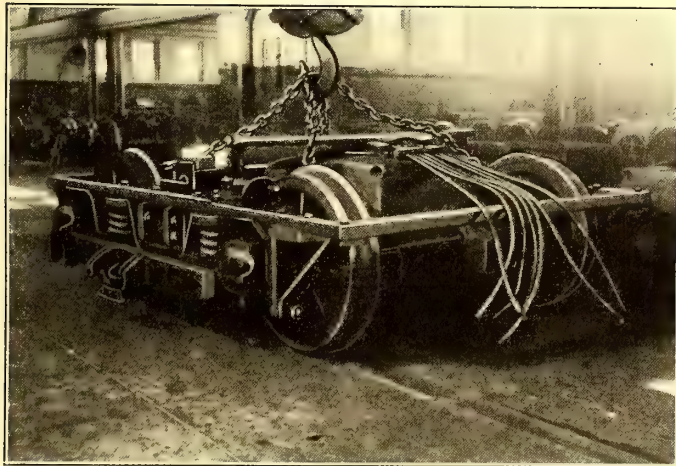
LIFTING TRUCKS BY HOOKS IN MOTOR CASINGS
